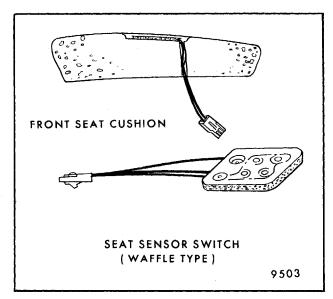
Automatic Door Lock Seat Sensor Switch (Cadillac Styles)
